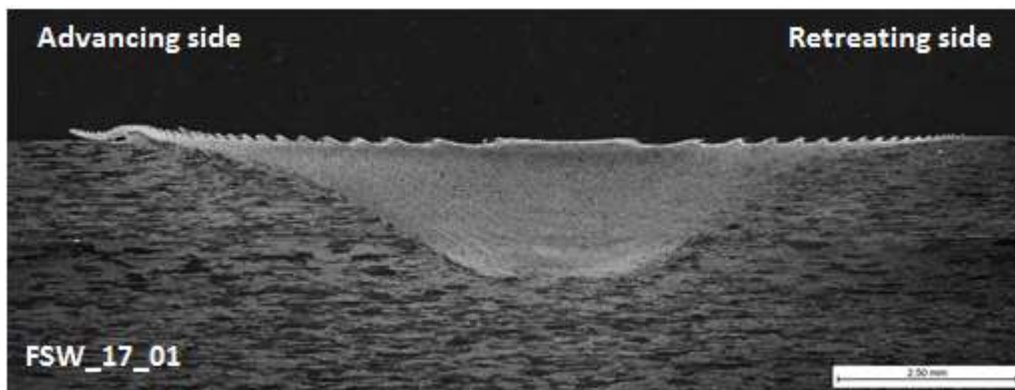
Cross-section of a FSLW joint produced using a 1.3 mm thick AA2198-T8 sheet on top of a 2.3 mm thick AA2198-T8 sheet.
